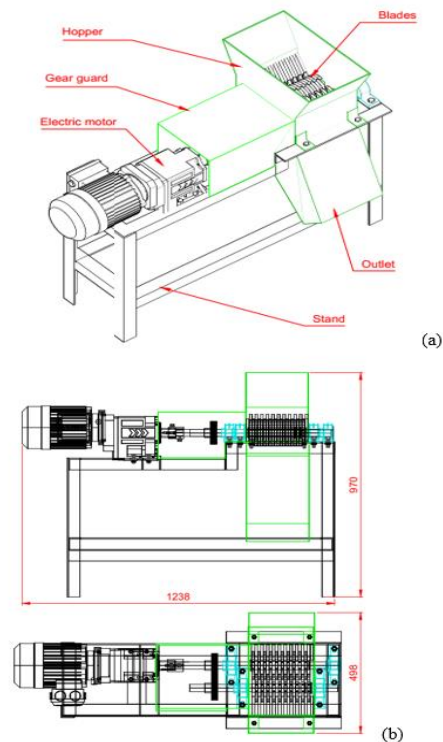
Concept 1 (a) Isometric View (b) Orthographic Views
